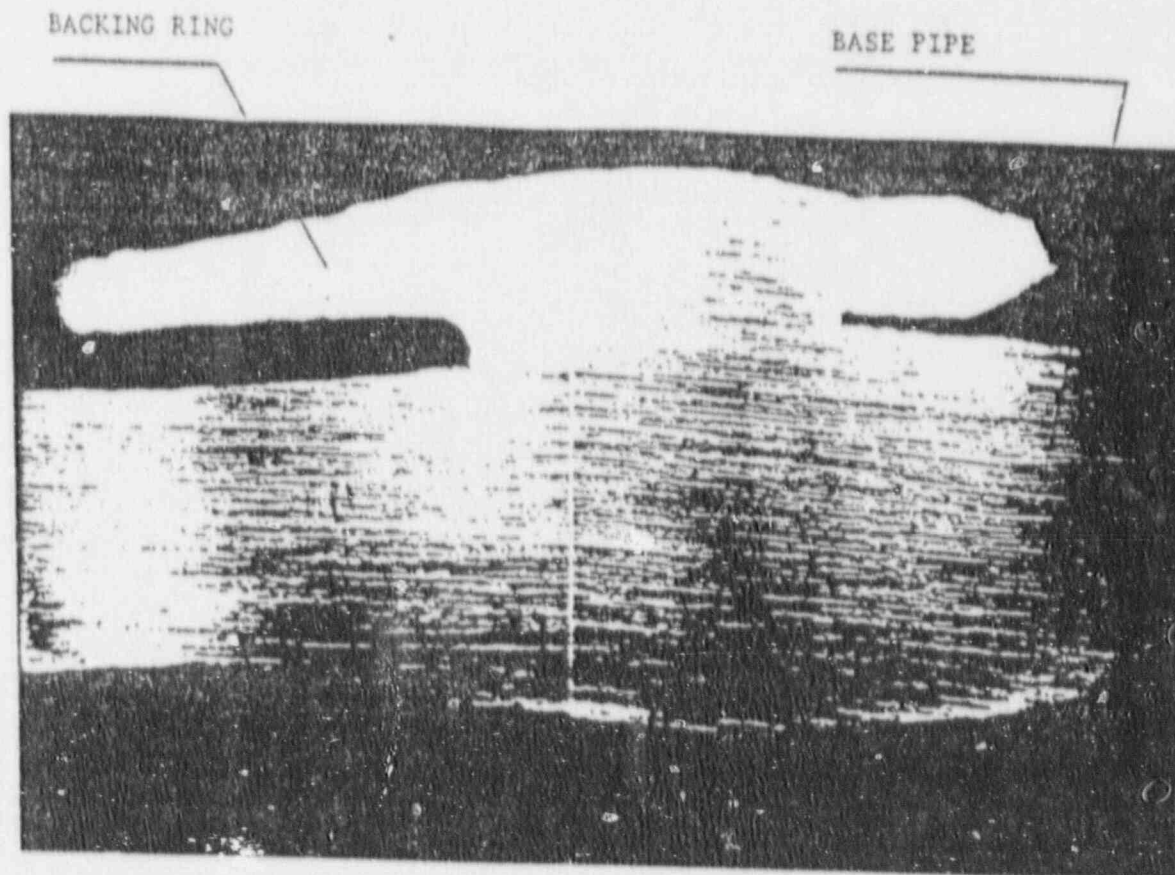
Photograph showing the crevice between the base pipe and backing ring.
